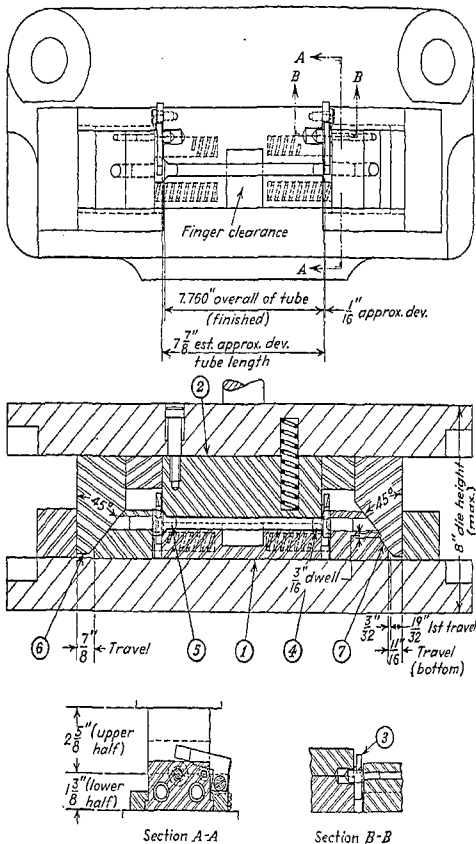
Tube-flanging die. (Harig Mfg. Corp.)
